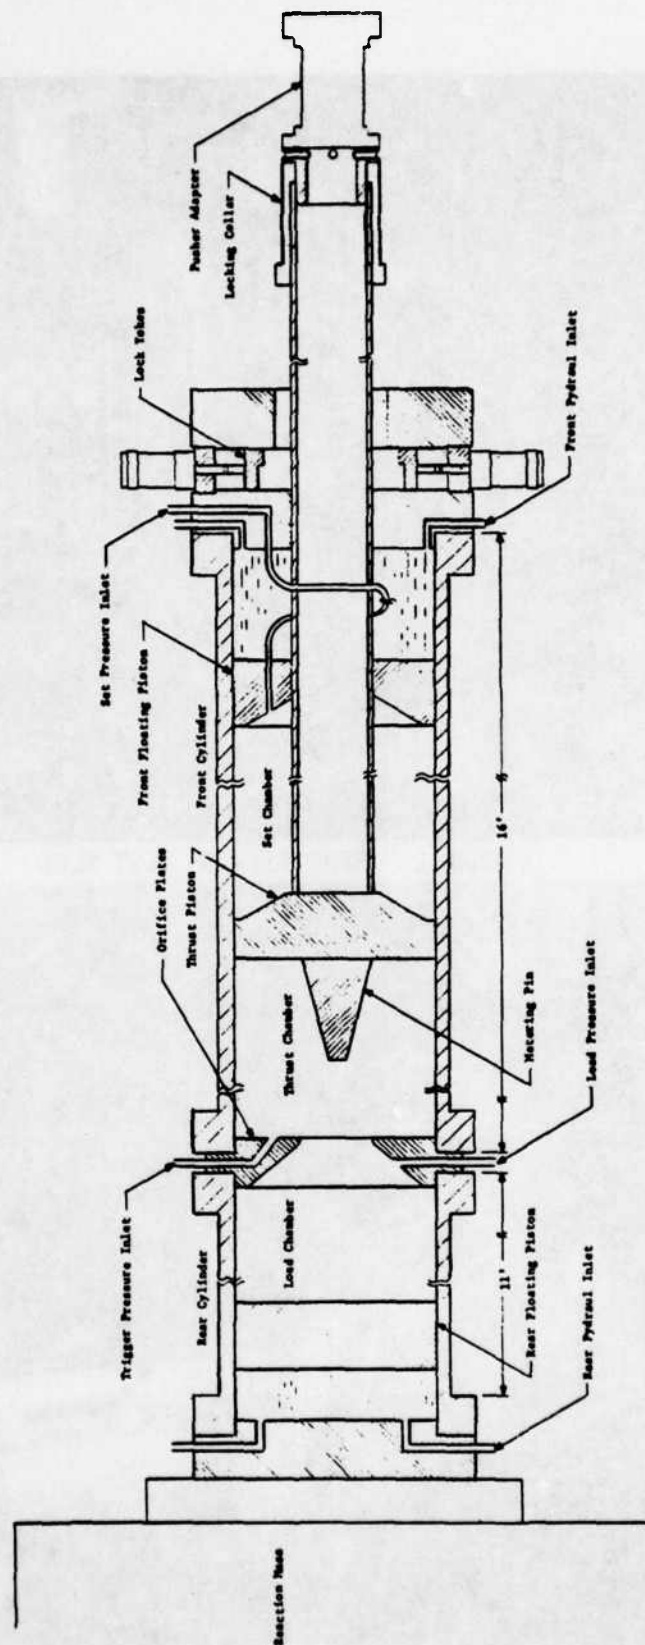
CROSS SECTION VIEW OF THE ACTUATOR
